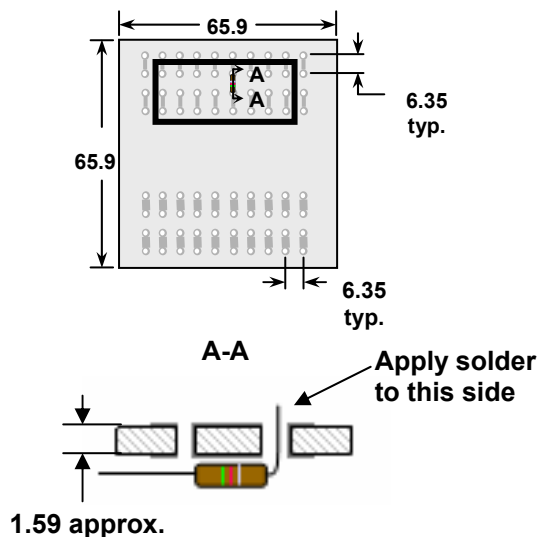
Plated through-hole sample configuration used during reduced gravity testing. All dimensions in millimeters.
